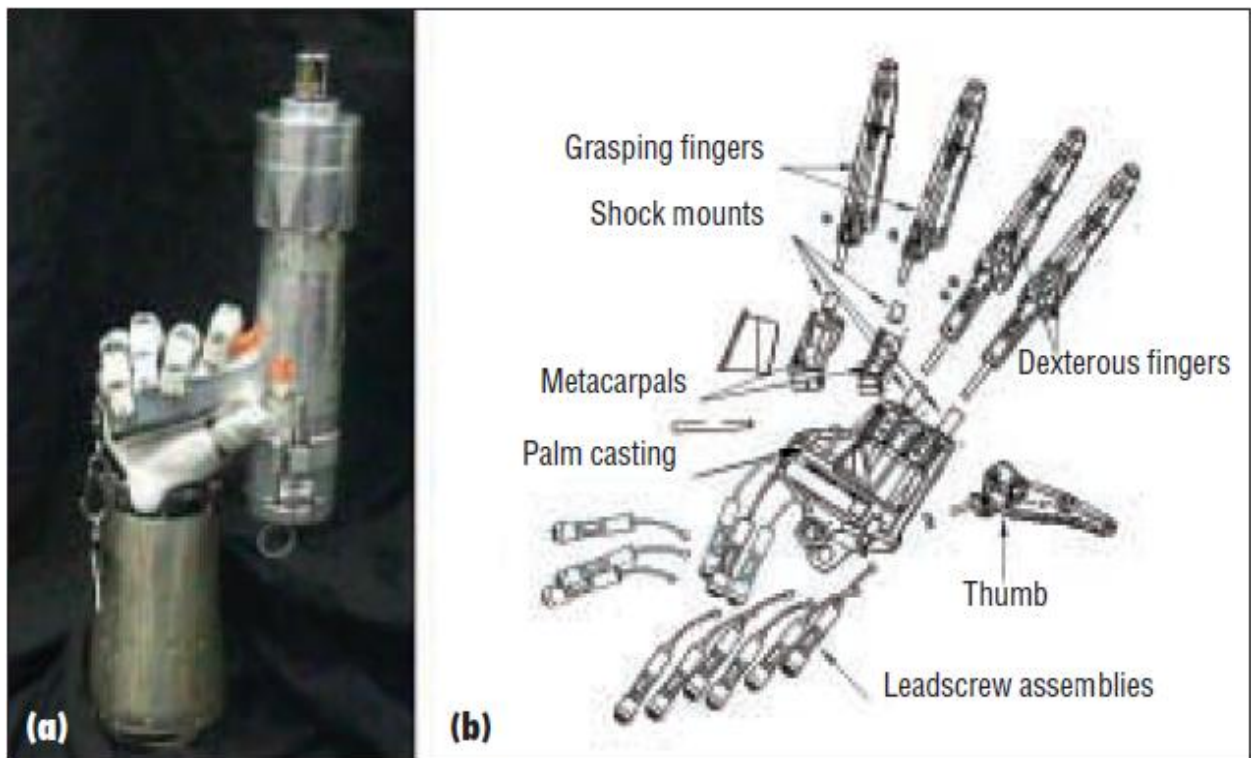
Robonaut Hand, (6a) Hand holding tool, (6b) Hand parts.[4]
